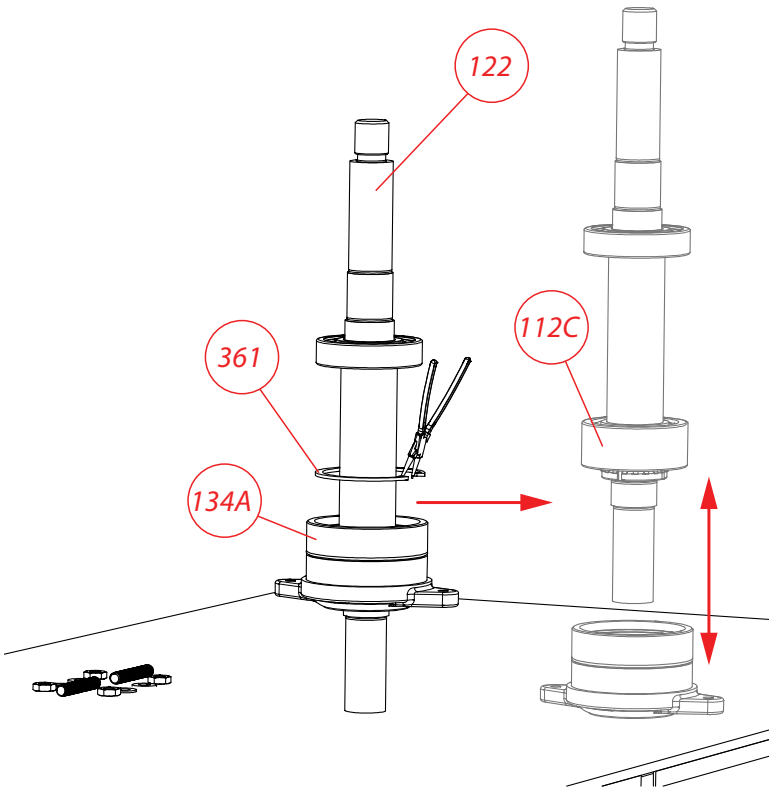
Remove bearing housing (134A) from thrust bearing (112C)
